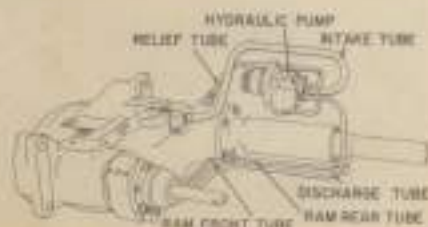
Drawing showing the positions of the various power steering tubes, on D-14 and D-15 non-diesel tractors.
